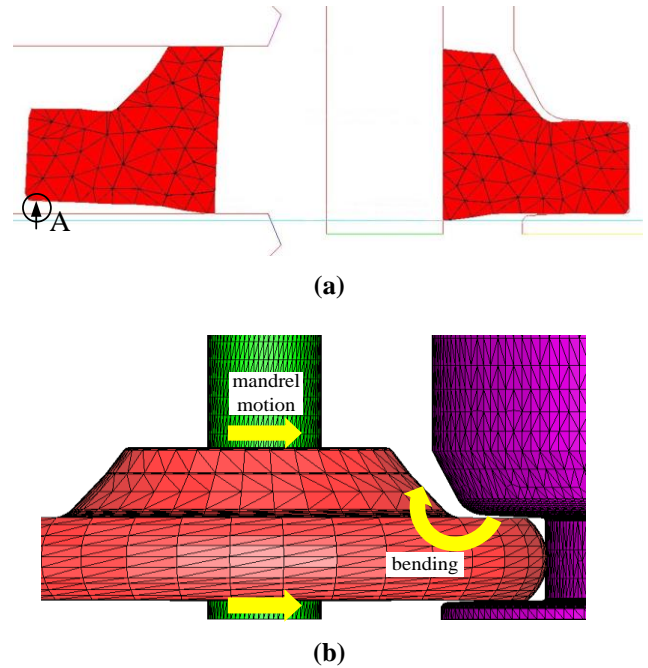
Lifting of lower surface of the blank; (a) lifting (b) bending
